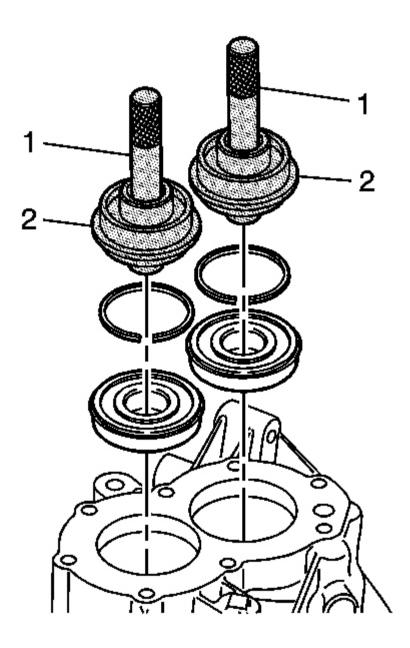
Installing Input & Output Shaft Bearings Courtesy of GENERAL MOTORS CORP.
